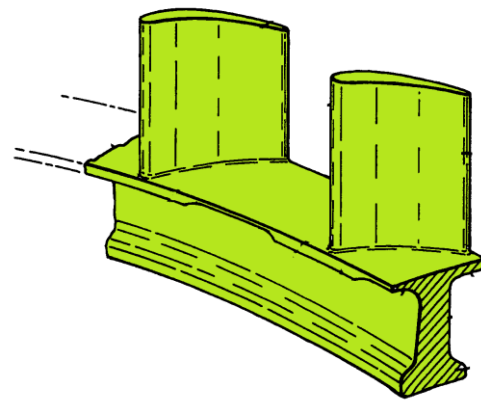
Integrally Bladed Disc Rotor (Blisk) (US7445433 B2, 2008)
